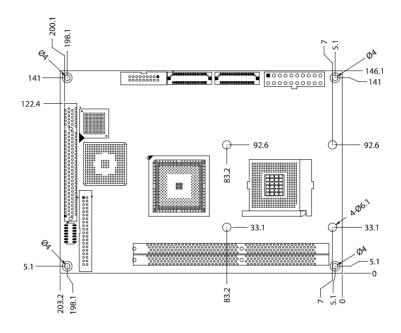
PCM-9580 Mechanical Drawing (component side)
